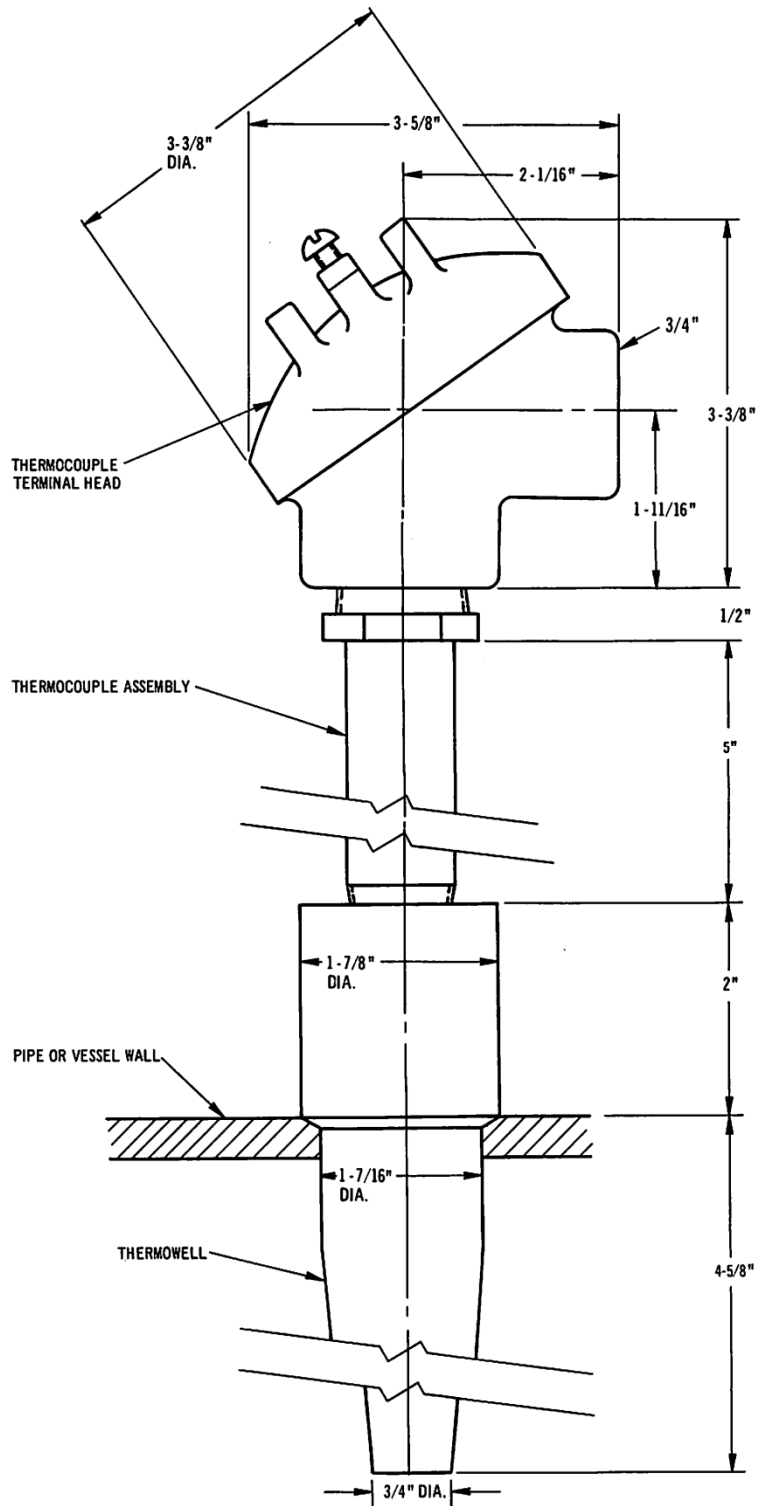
Figure 6.9-6 Typical Thermowell Type Thermocouple Mounting [Vol. II, Chapter 6, p.6.9-10]
